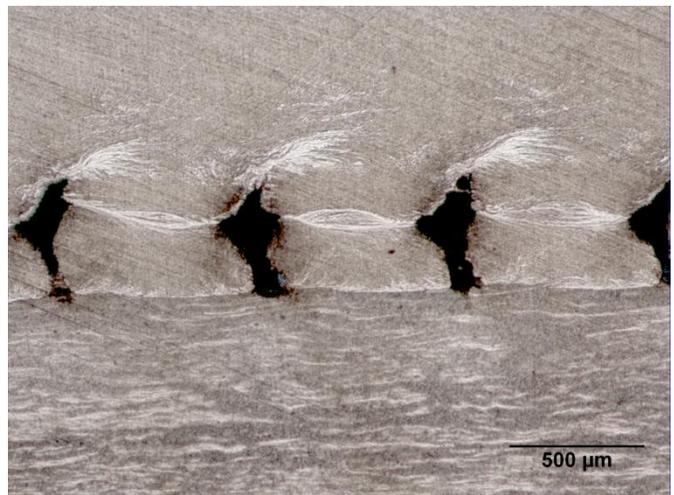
Periodic voids in sample welded at 12 ipm seen from the side of the weld.
